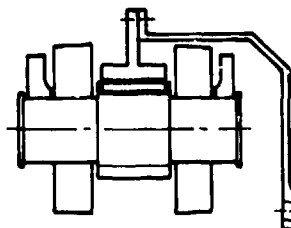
D SINGLE PINION WITH DUAL RETAINER RINGS AND INTERNAL GEAR OUTPUT
